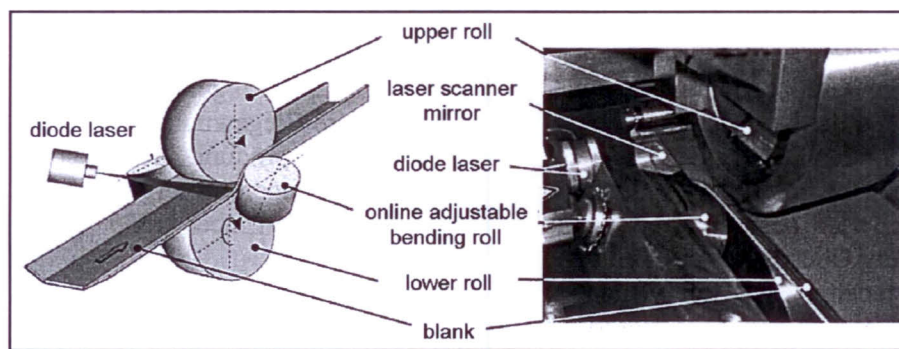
Schematic showing one-level roll forming system with integrated laser [10]
